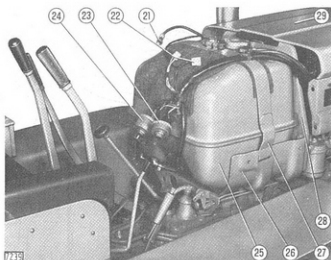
View of the Tractor with the Rear End Panelling, Firewall and Dashboard removed
